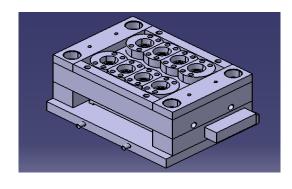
Overall assembly view of injection moulding which consists of female section consists of cavity plate.
